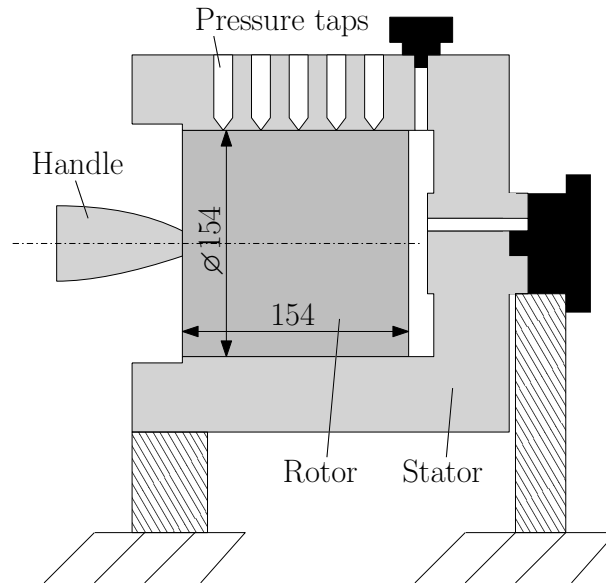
Cut-view of Kingburry's gas bearing apparatus presented in 1897
